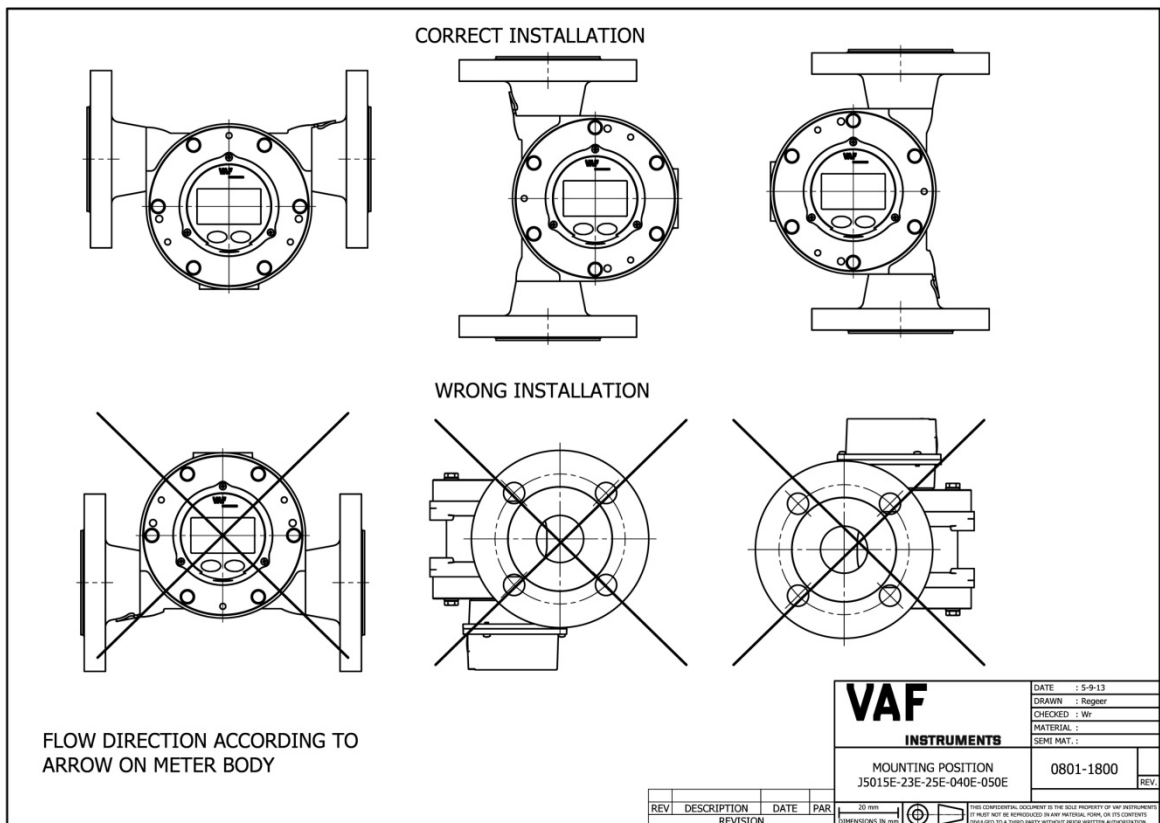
Drawing 0801-1800 – Mounting position J5015E-23E-25E-040E-050E
